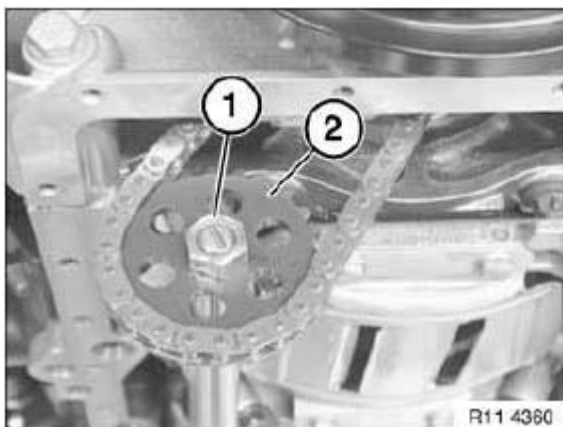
Identifying Oil Pump Sprocket Wheel And Nut
